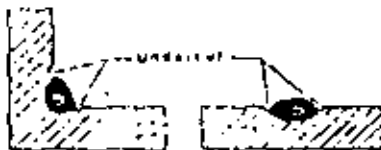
Undercut in a weld. The effect is undesirable from the appearance standpoint and may weaken the joint.
